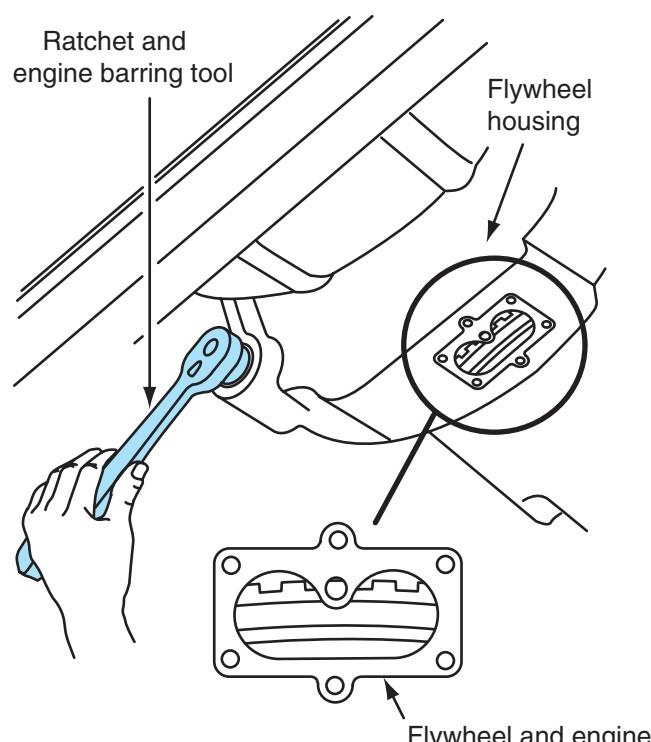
Barring an engine using a toothed barring tool while observing the engine position scale.
